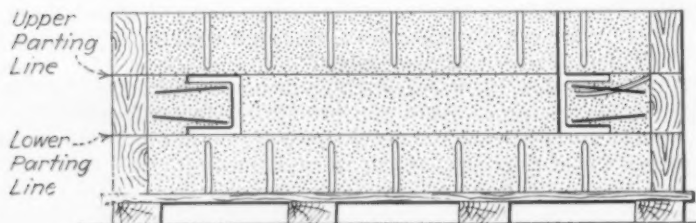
Plan of three-part base mold showing (upper-view) rodding and venting details. Sectional view of closed mold underneath.
